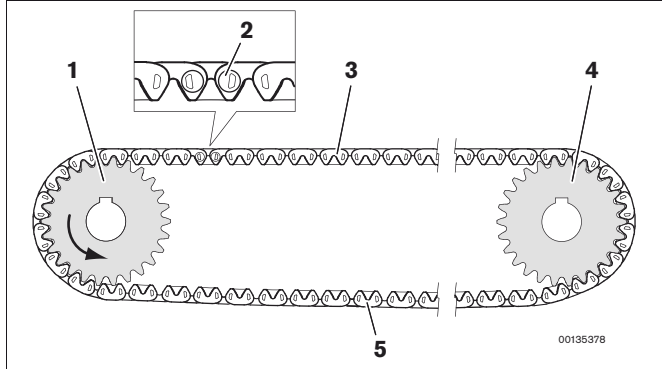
Inverted tooth chain drive with inverted tooth conveyor chain
